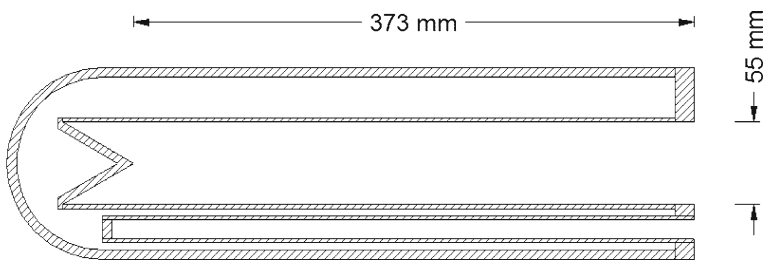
Drawing of the sodium-filled heat-pipe blackbody source
